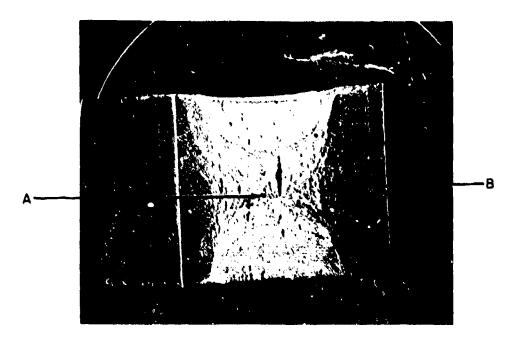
Fracture surface of an HY-130 fatigue specimen, 10x.
